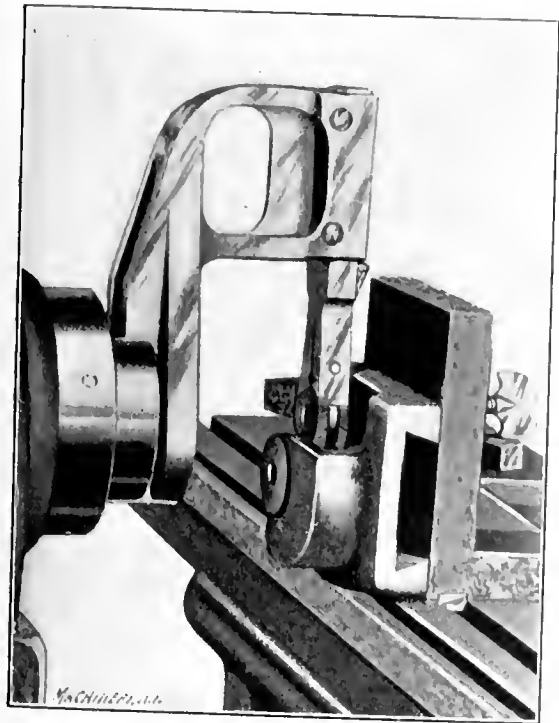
Oscillating Miller Facing the Bosses of a Casting
